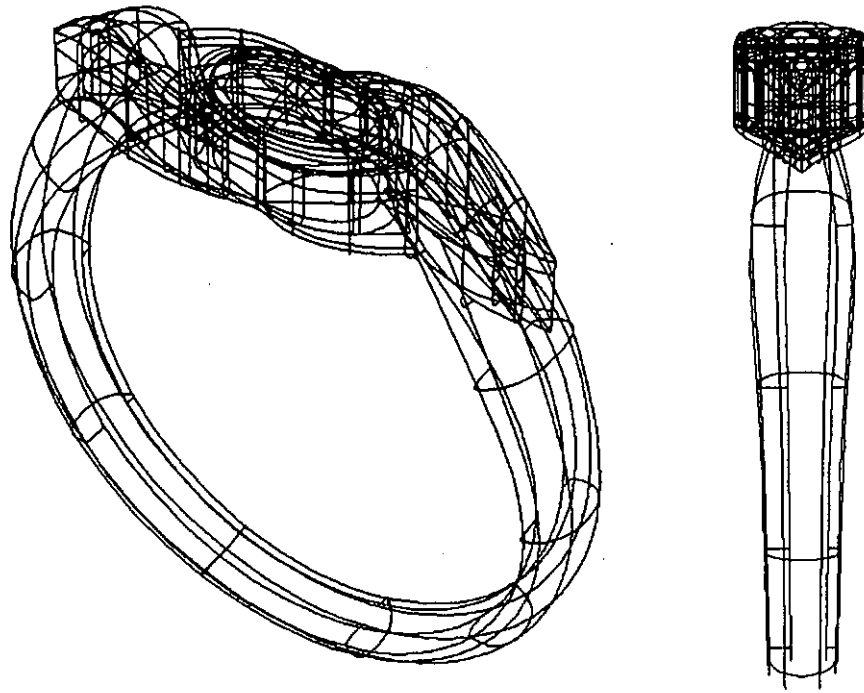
Wireframe model of jewel ring in isometric view and side view.
